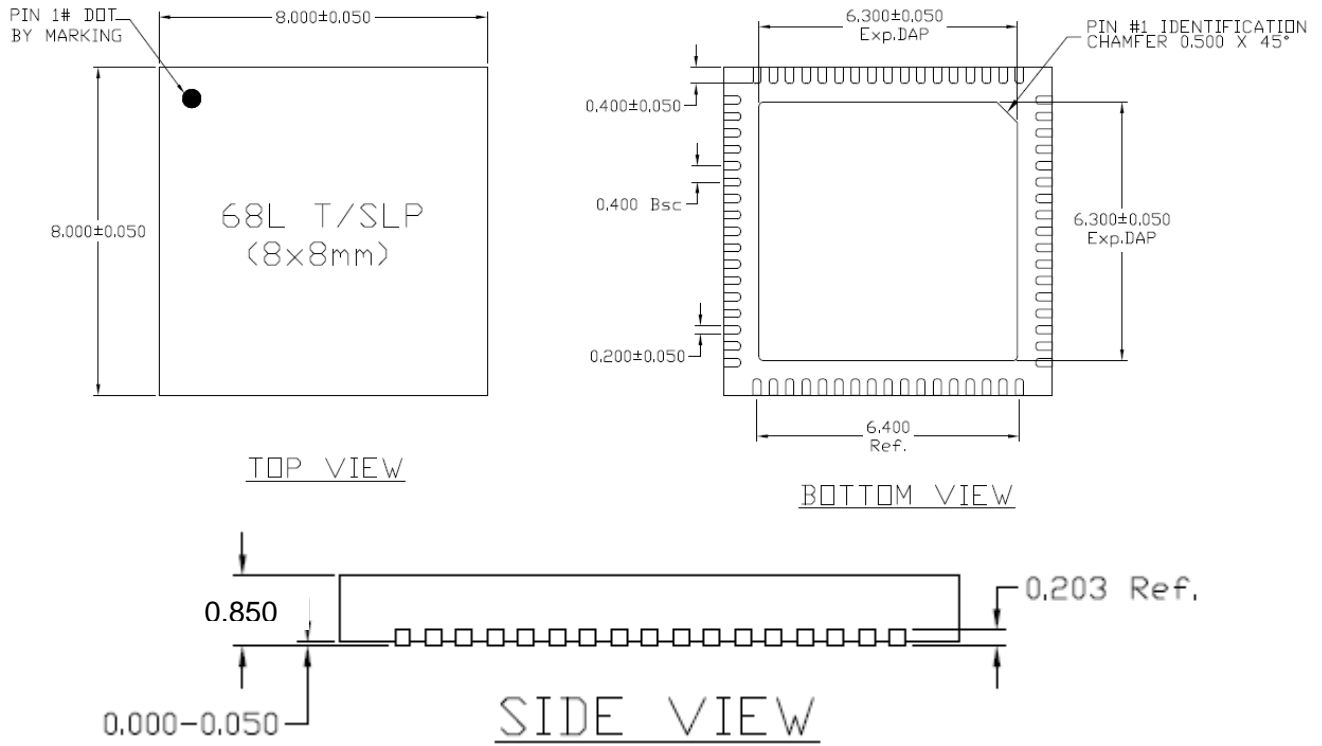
QFN-68 Package Outline (Top, Bottom, and Side View)
